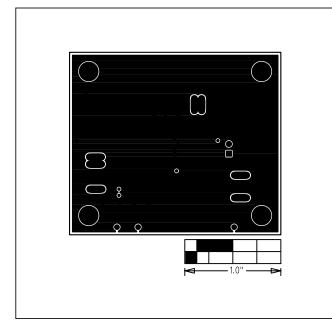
MAX15040 EV Kit PCB Layout—Inner Layer 3
